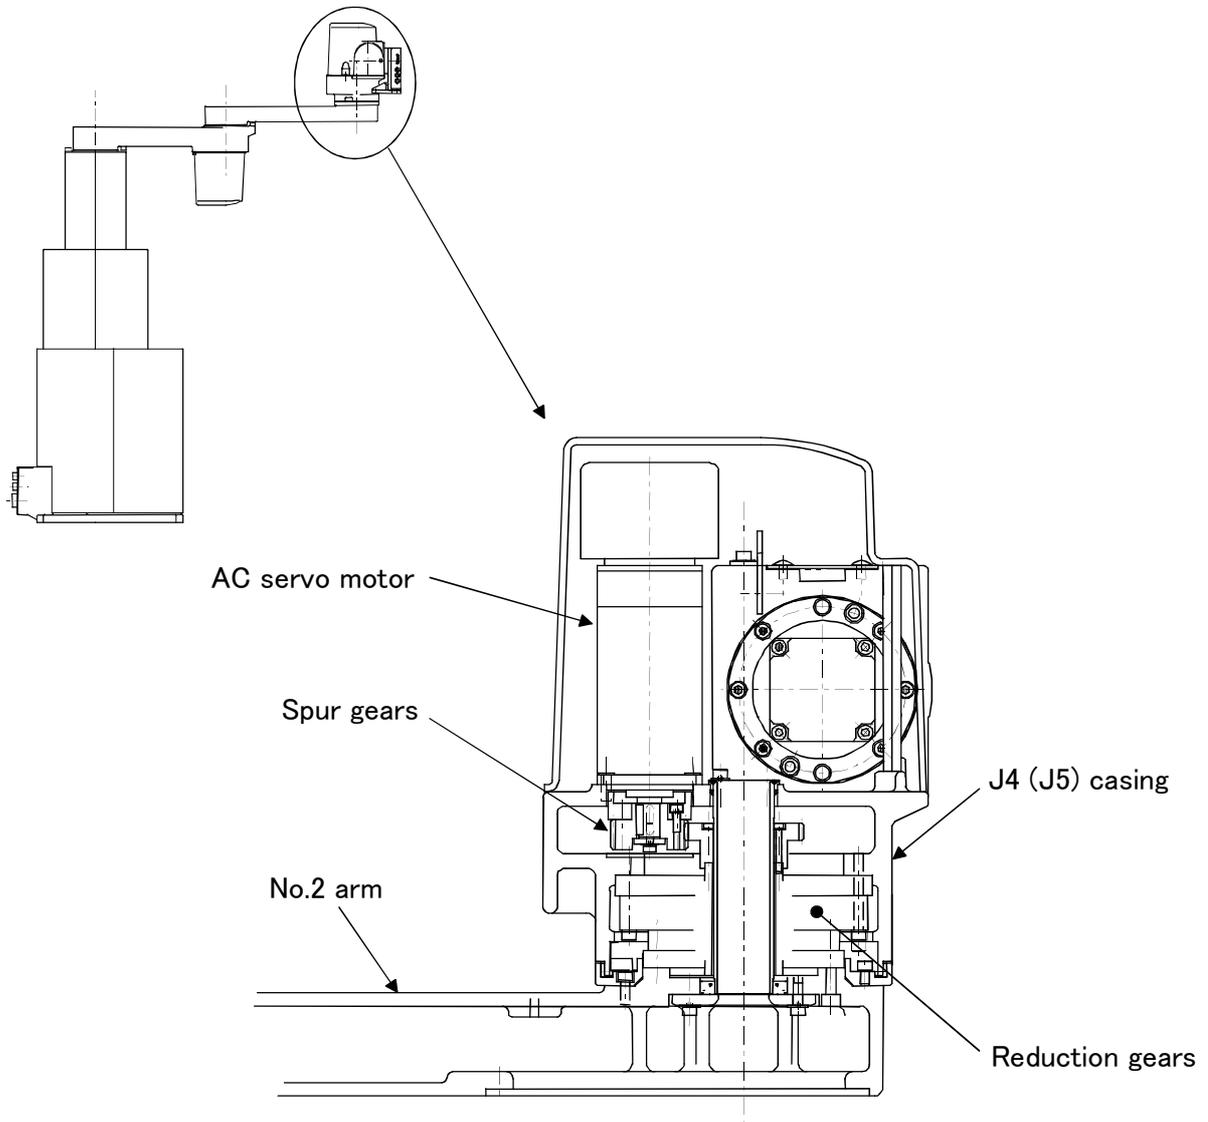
J4 axis drive mechanism (RH-1000GHDC-SA/GJDC-SA)
